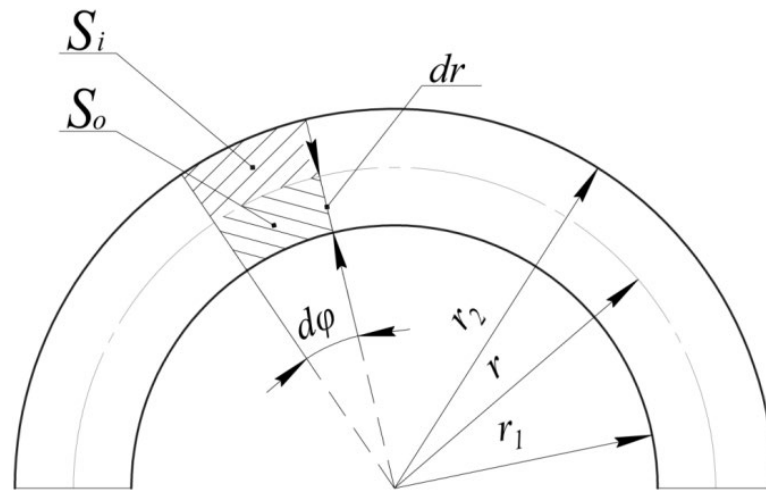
Scheme for calculating the displacement of the extrusion radius in 3D printing.
